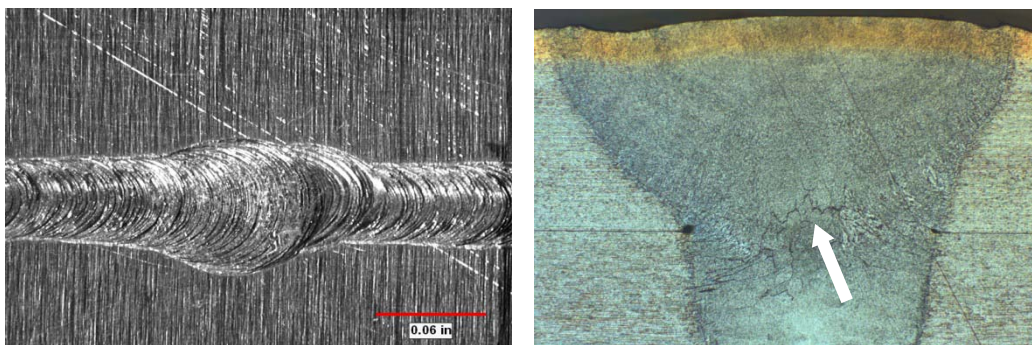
a) Top surface of weld bead showing divot defect and b) cross-section of divot showing solidification cracking across lap interface (see arrow).
